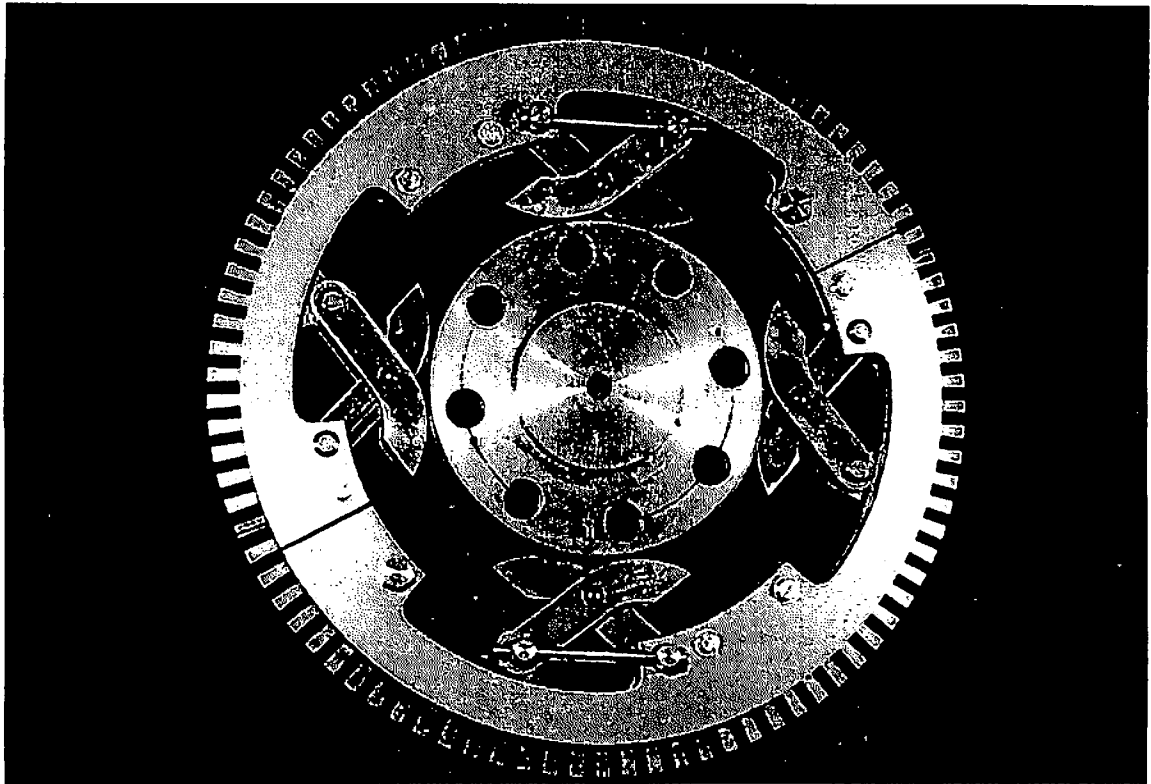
Divisible chopper disk, fitted on shaft \varnothing 110 mm
